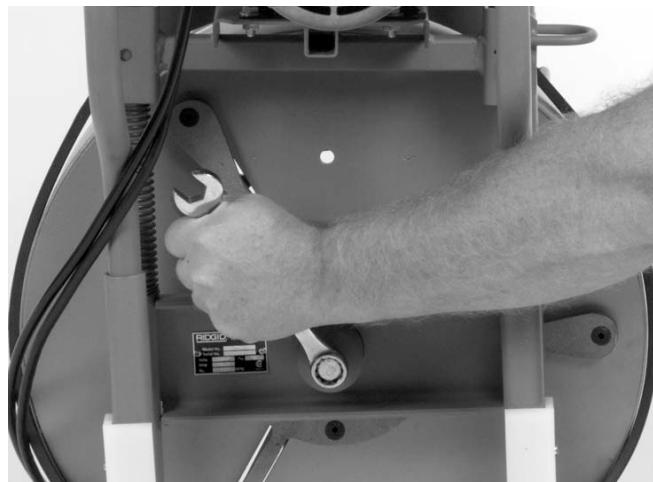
Remove Bolt Which Fastens Drum Assembly to Machine Frame
